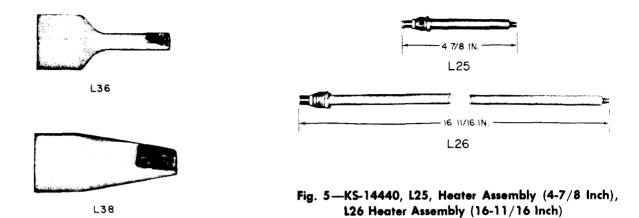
KS-14440, L36, Tip (1/8-Inch Coated), L38 Tip (3/16-Inch Coated)
